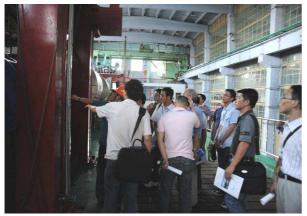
The technical tour visiting the Harbin Electric Machinery Works
